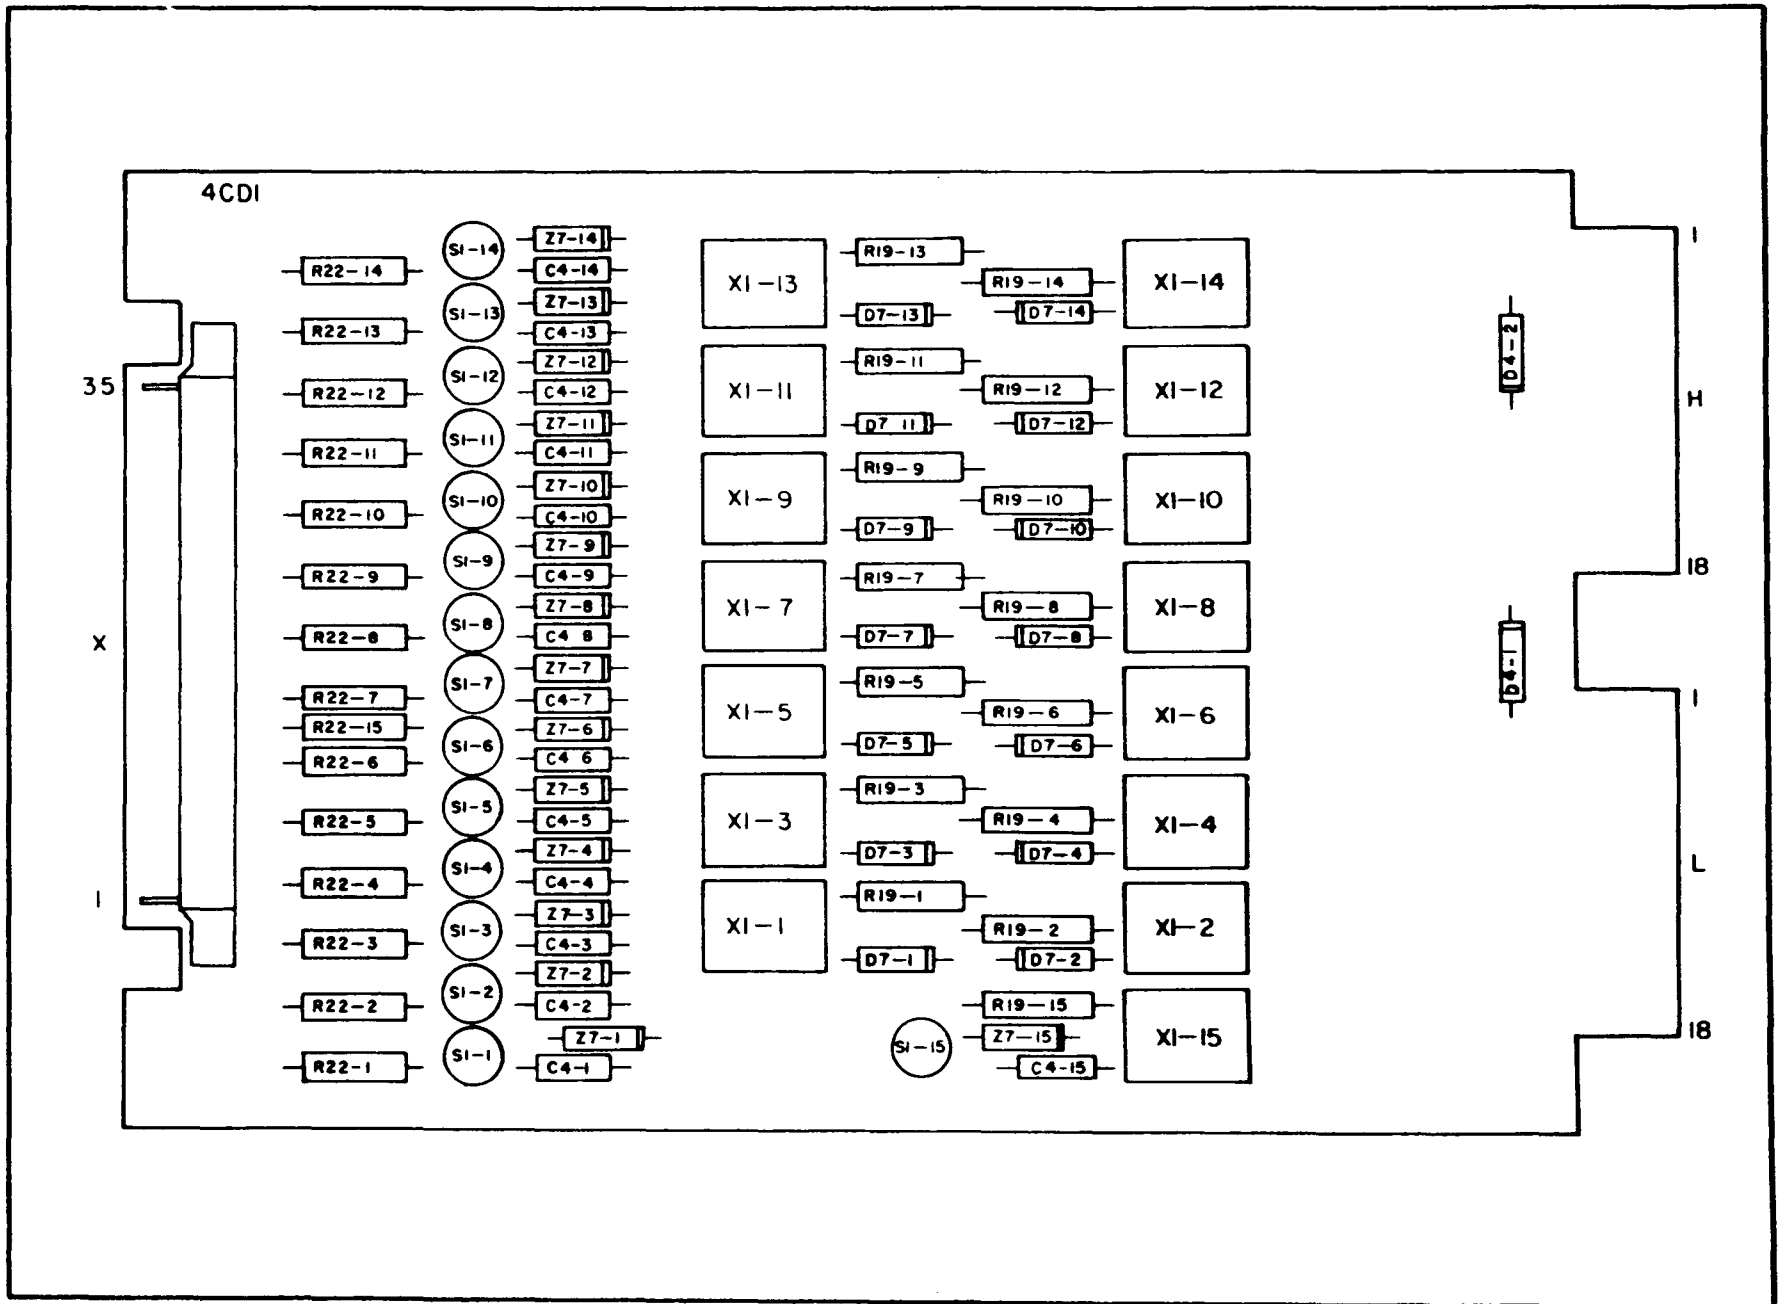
4CDI ASSEMBLY (REF. DWG. 743A391, SUB 3)
